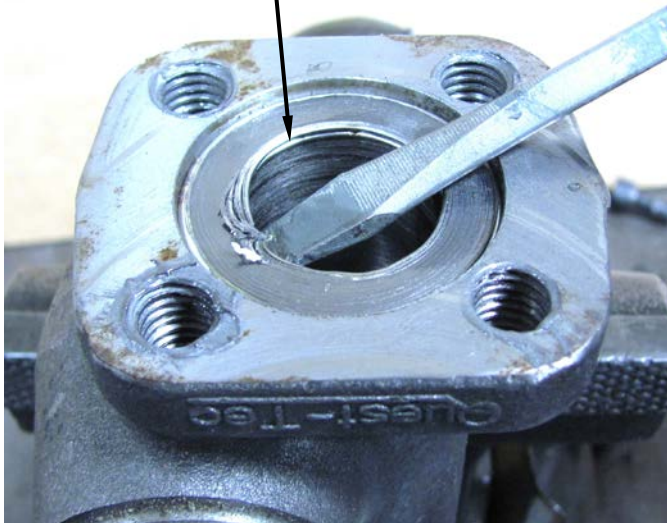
CAREFULLY remove spiral-wound gasket from valve body recess with a flat blade screwdriver.
